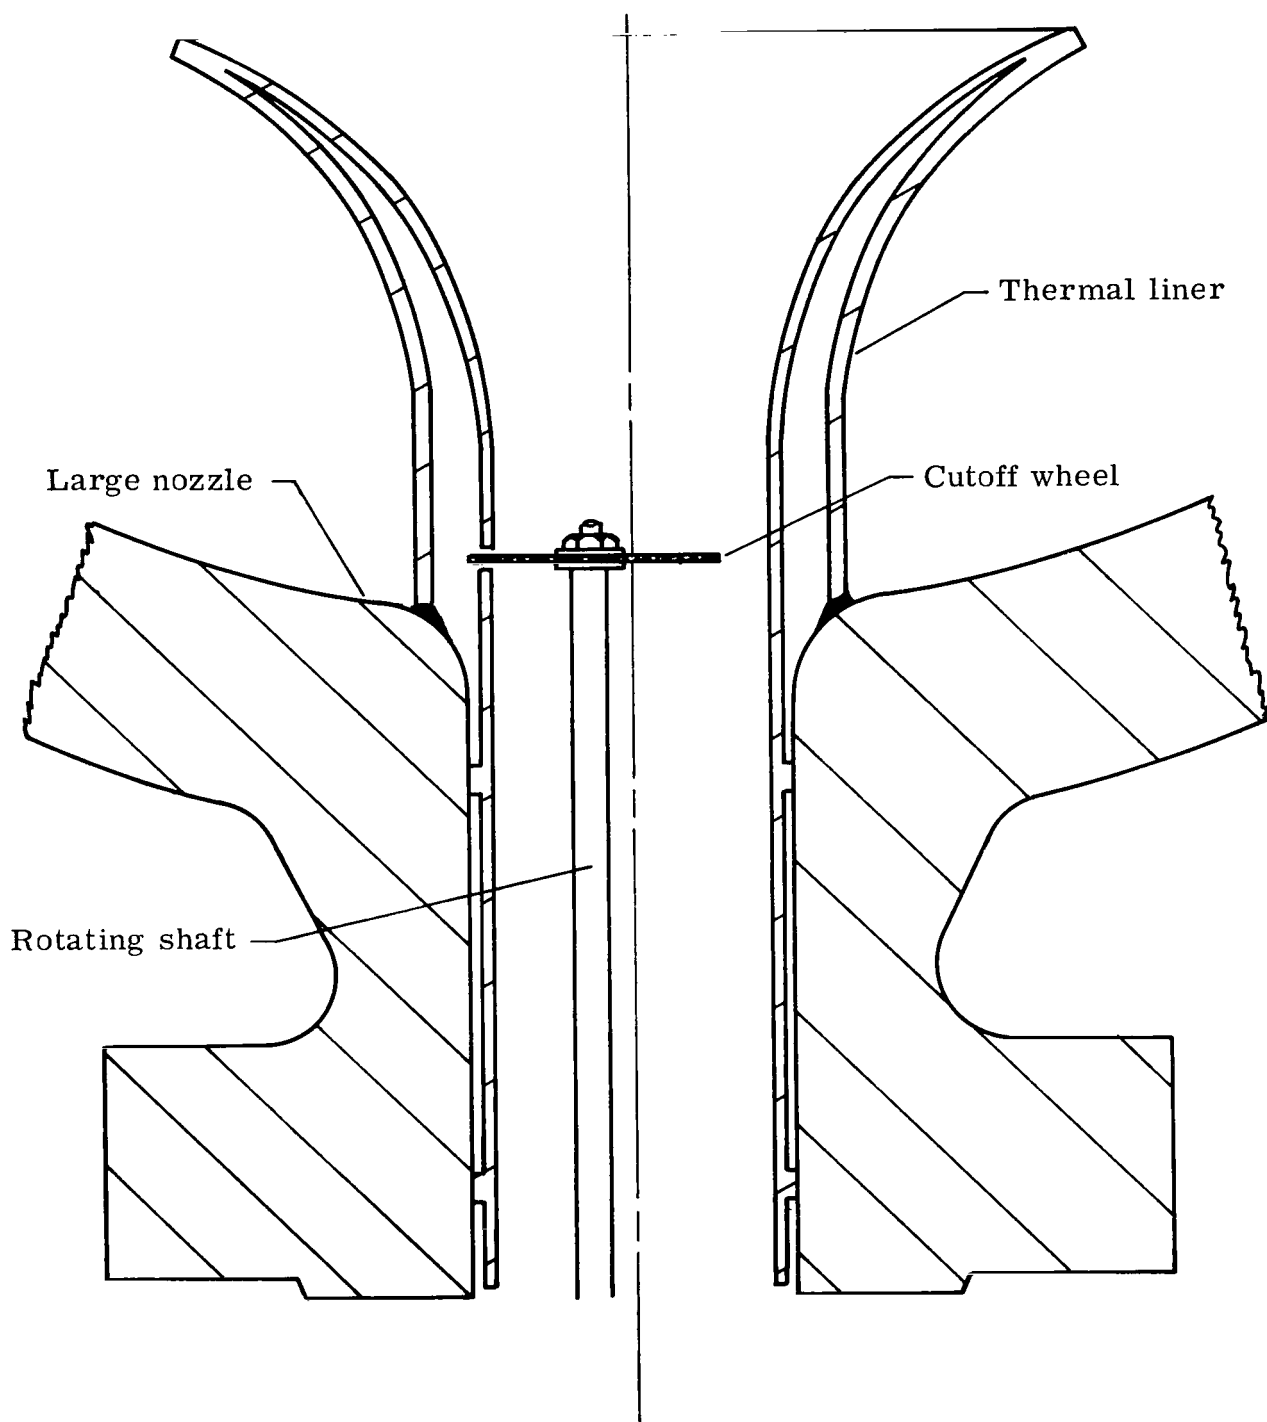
Cross-sectional view of air-storage-vessel nozzles with inside section of liner being removed.
